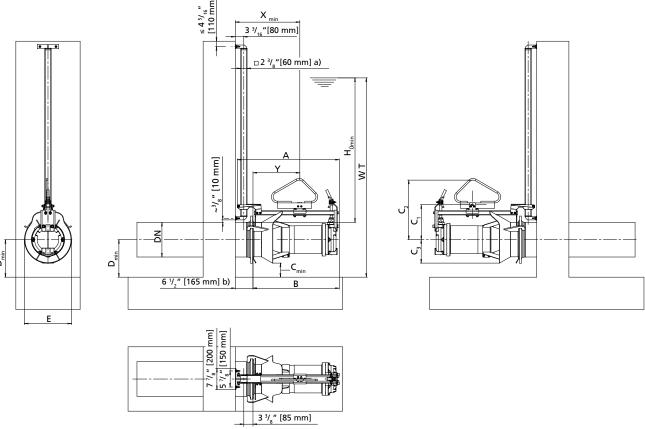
Dimensions of an Amaline 200, 300, 400; motor housing made of gray cast iron
